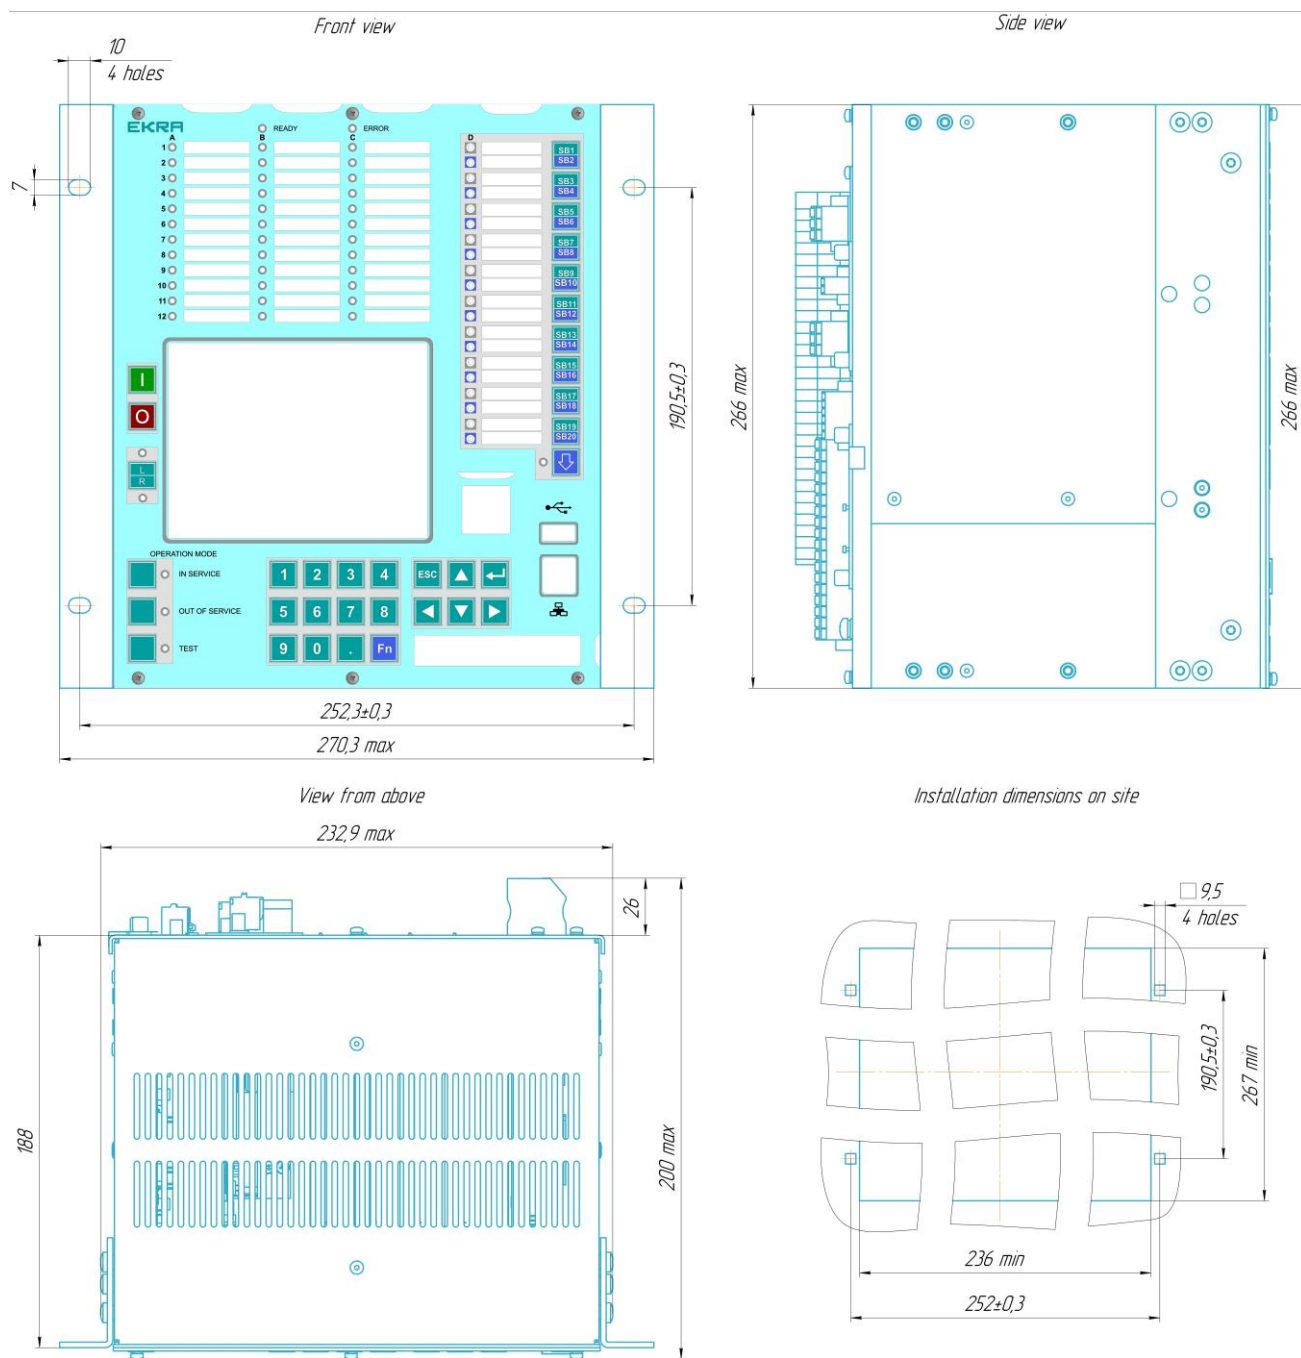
General view, overall, installation dimensions of the ED2 devices of ½ 19" design
